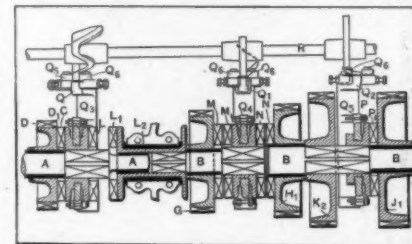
Arrangement of a main shaft and position of clutches on second speed gear
